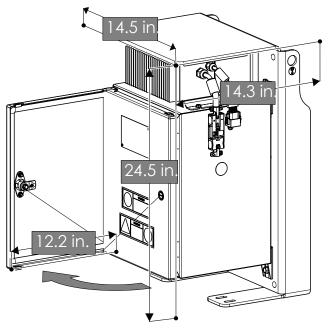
BCU dimensions. HOTSTART recommends a minimum front-toback clearance of 26.5 inches (67.2 cm) to account for door swing.
